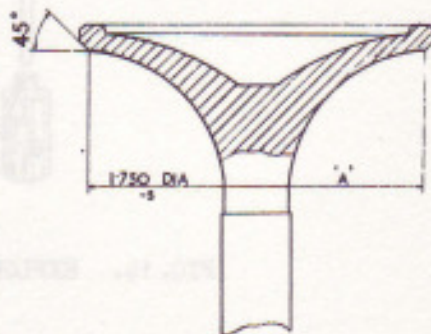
SECTION THROUGH HEAD OF INLET VALVE
